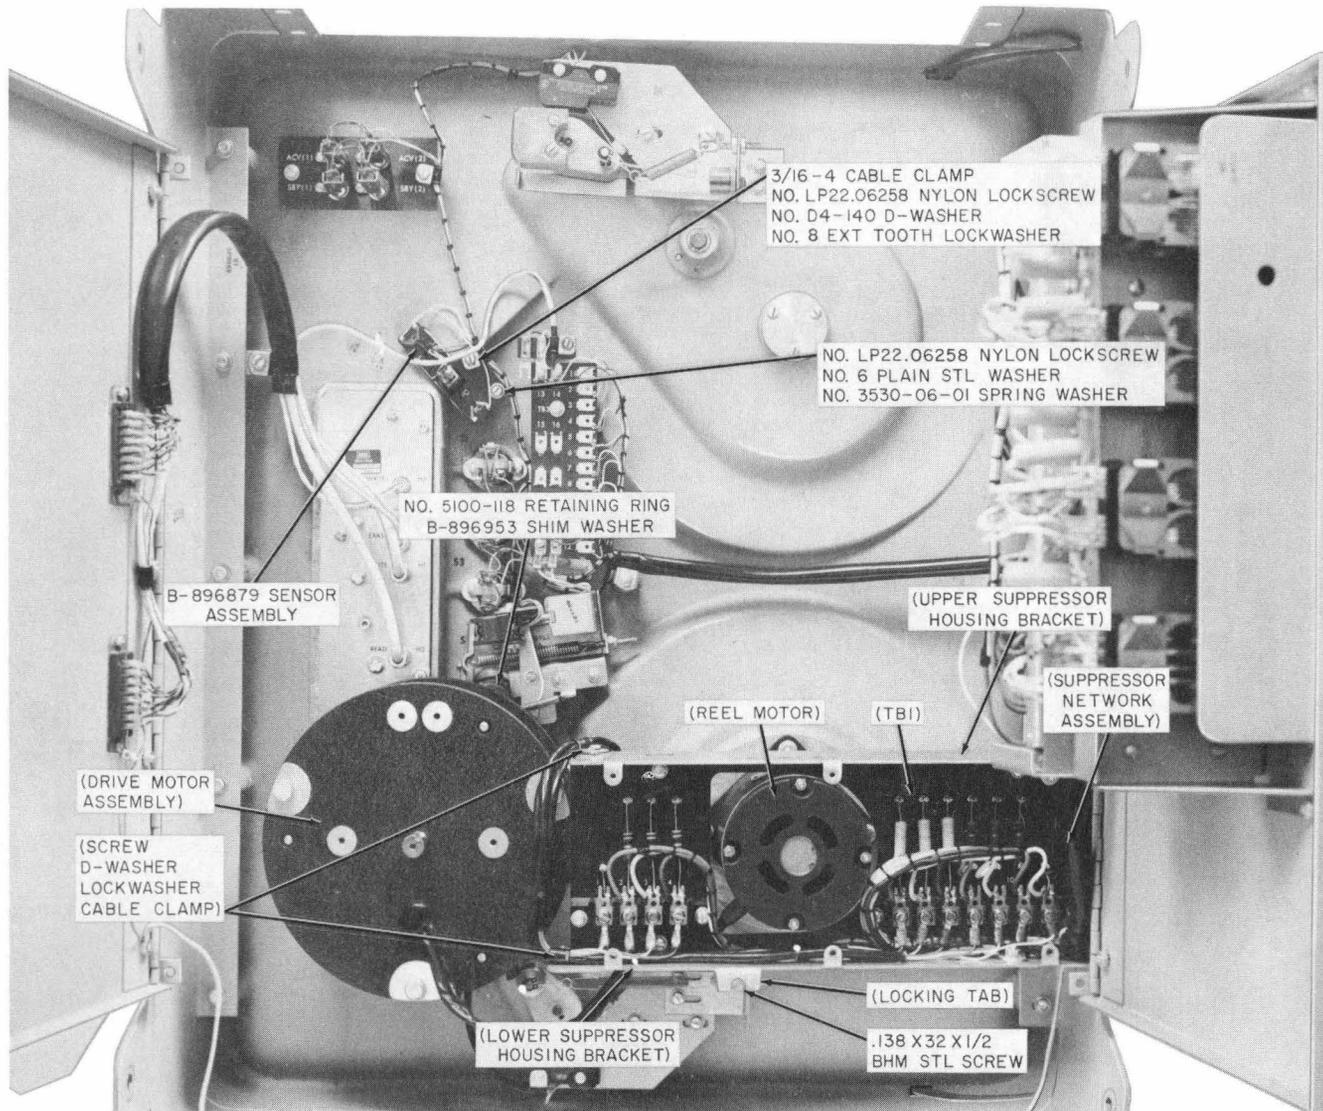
KS-19125, List 1 Recorder Assembly — Rear Internal View
